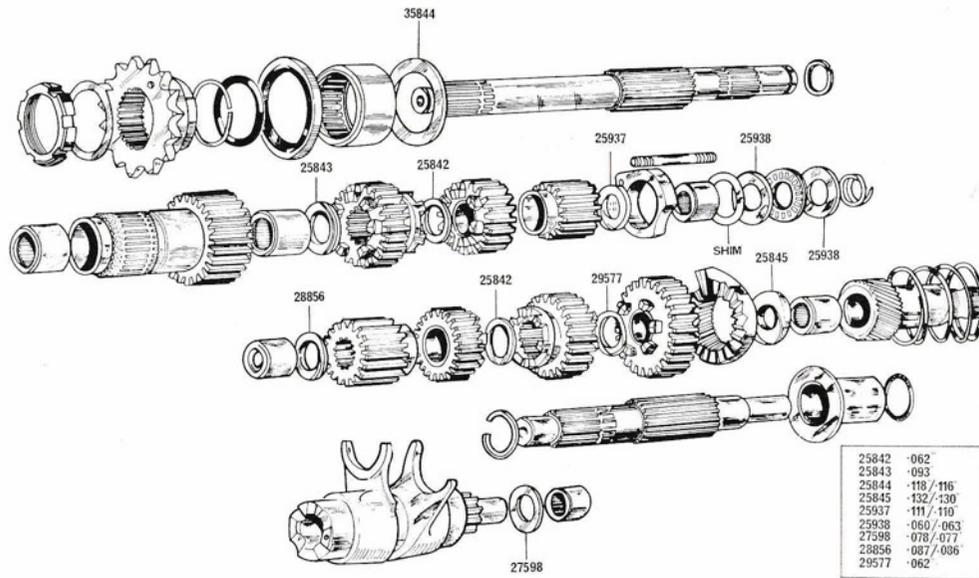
Gear cluster indicating position and thickness of all thrust washers.
